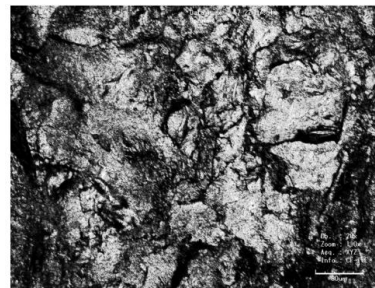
Laser microscope image at 20x of a Ti6Al4V workpiece produced by EBM.
